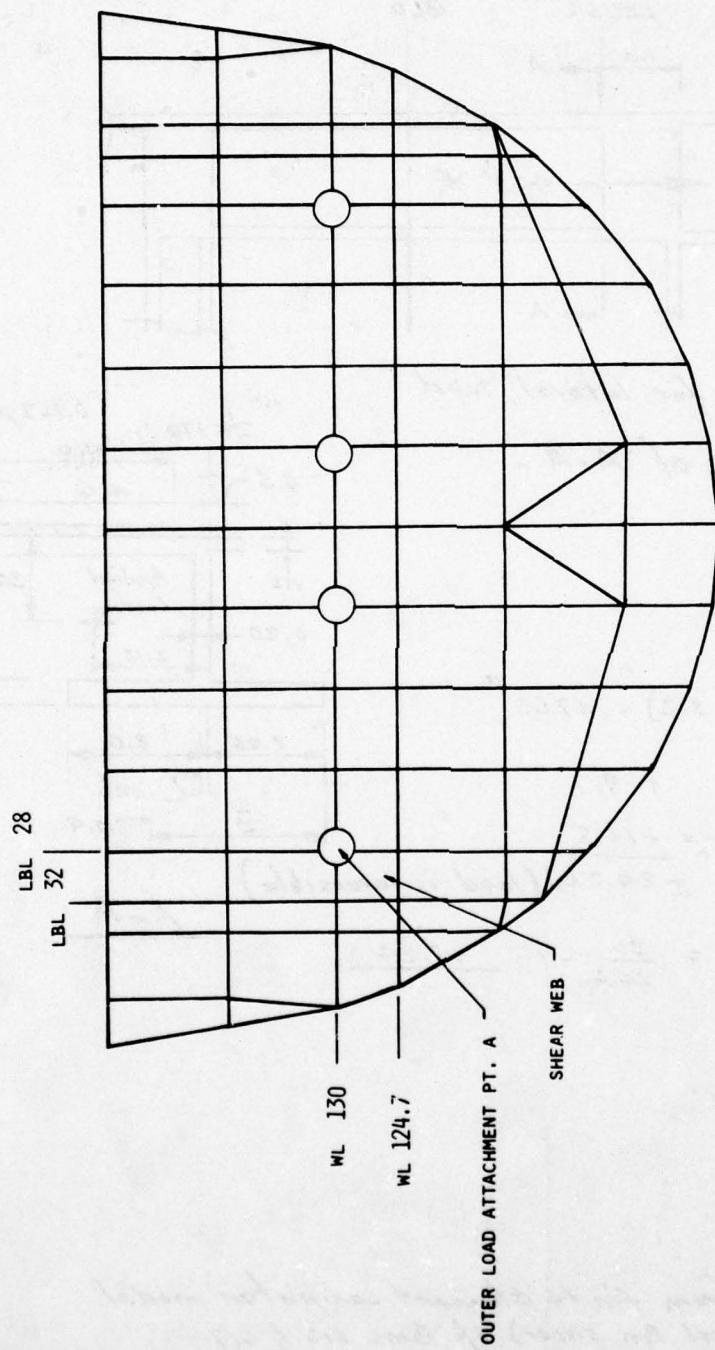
DAMAGE TOLERANCE CRITICAL CONTROL POINT LOCATIONS
